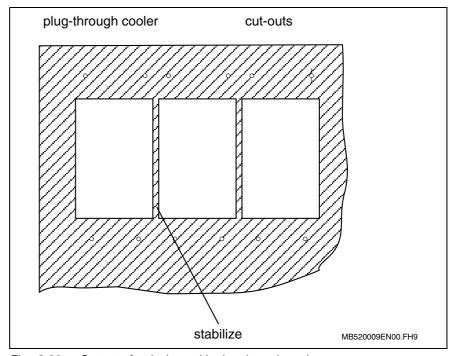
Cut-outs for devices with plug-through cooler
